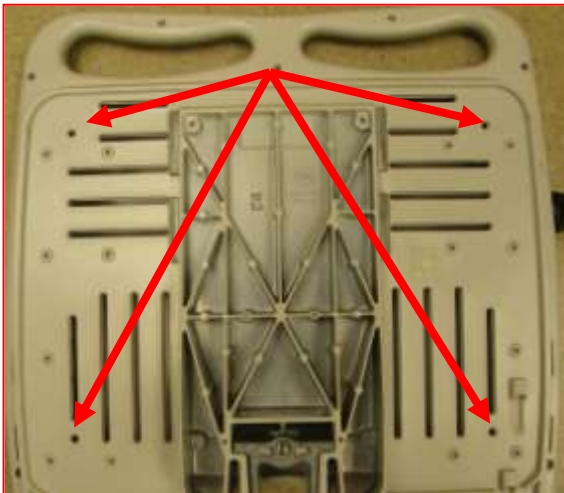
Showing where Screws are      Figure 2. Un-screwing the Insert
